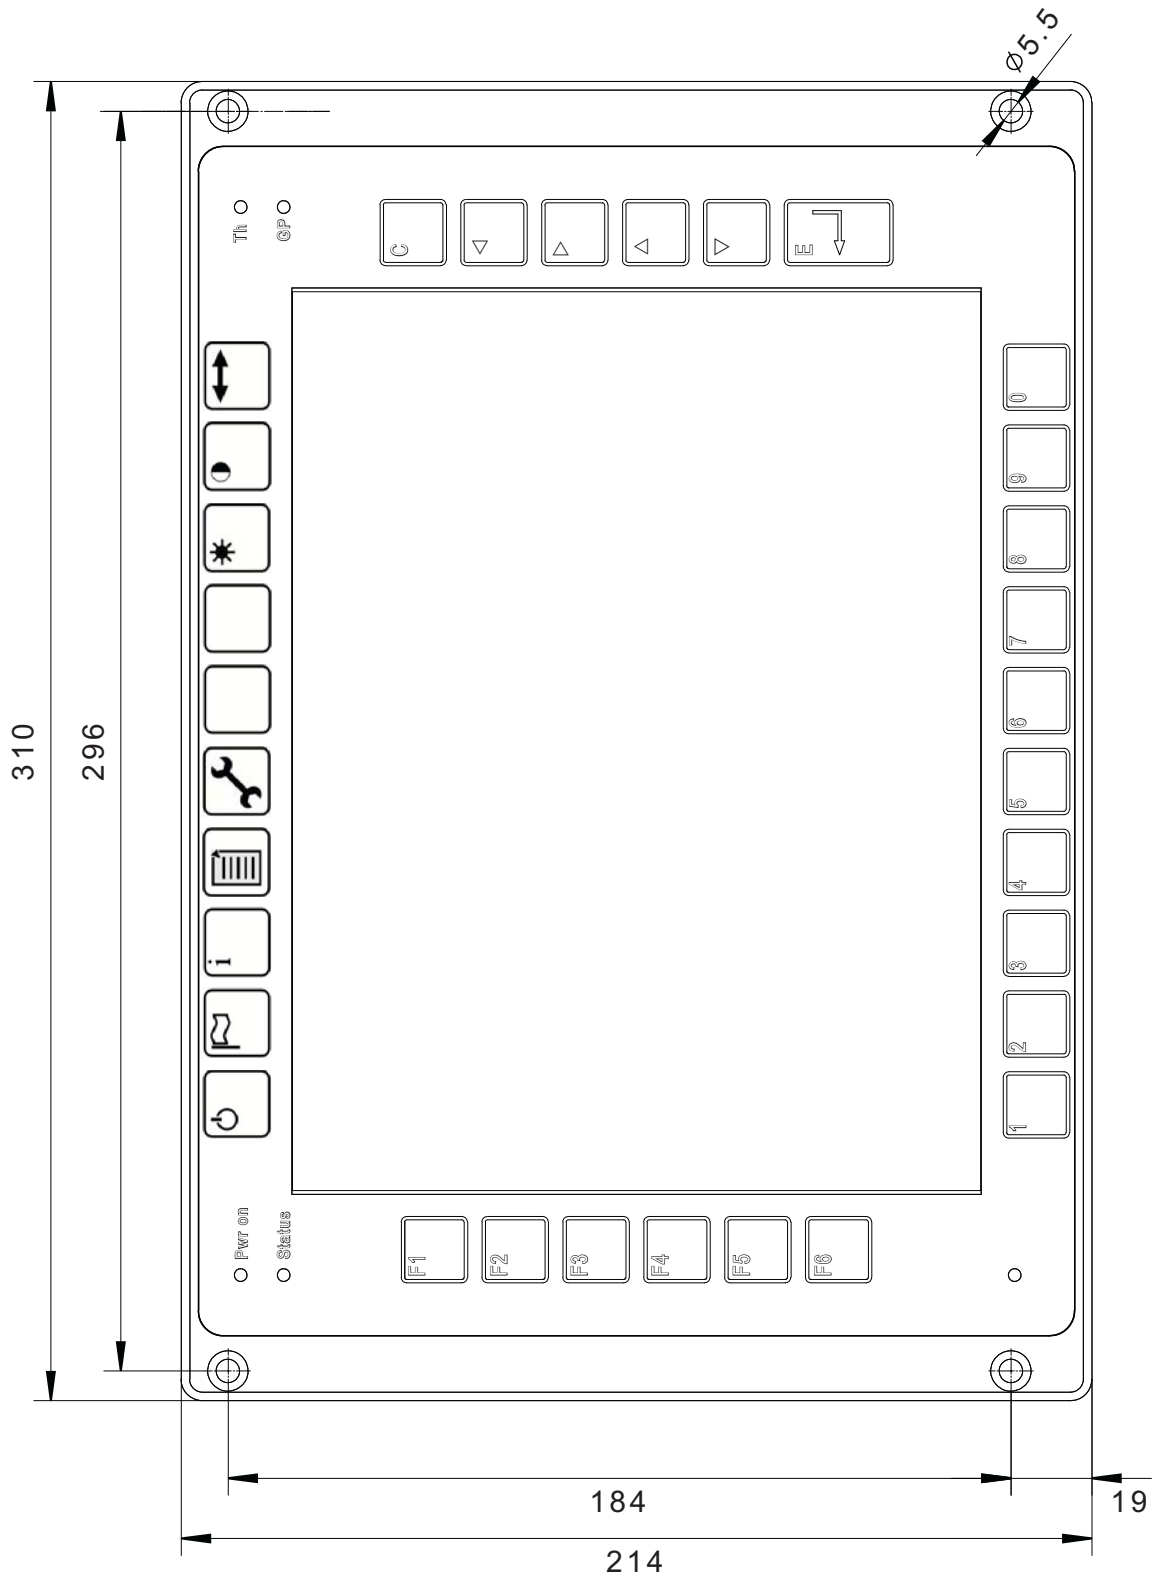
Assembly Drawing of the HMITR-104 Touch Screen Version (Front)
